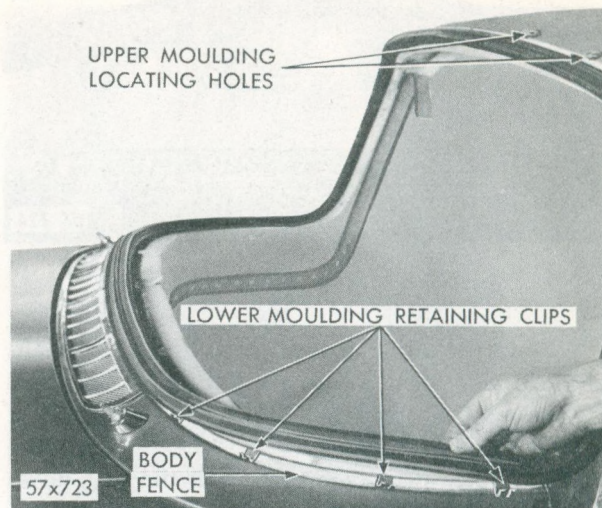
Windshield Weatherstrip and Moulding—Sides
